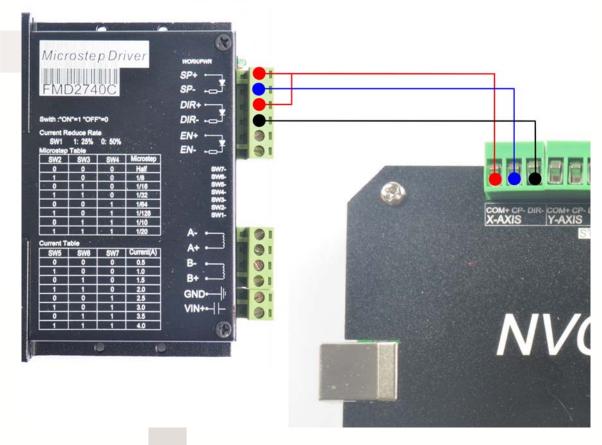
Wire method of Stepper motor driver connecting to NVCM
